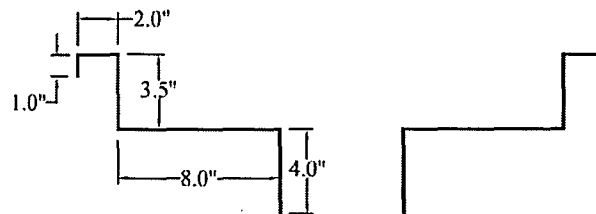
Dimensions of Bent 16 Gauge Steel
